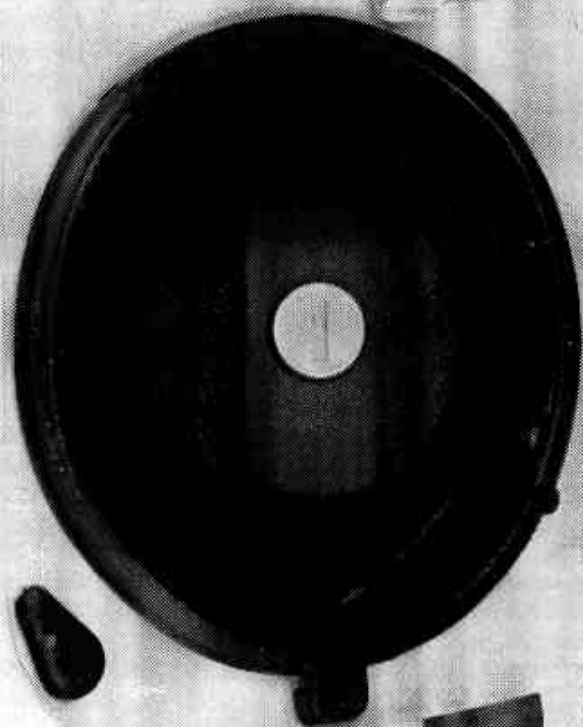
PRE-TEST FUEL FILTER CAP VIEW
